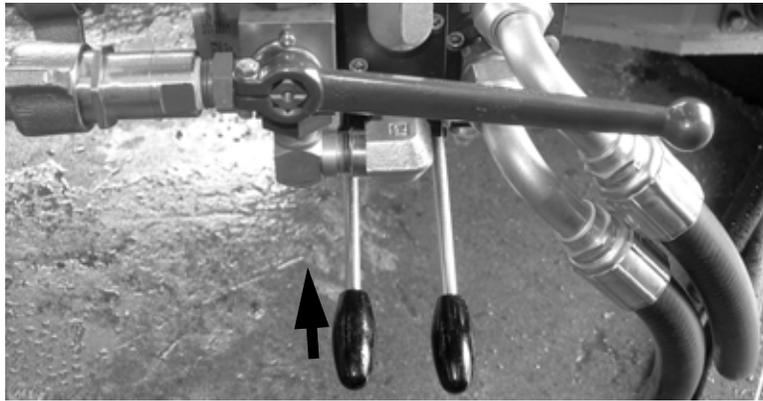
With the clamping circuit valves open, pull the clamping drive lever up to operate the auto-clamp.
